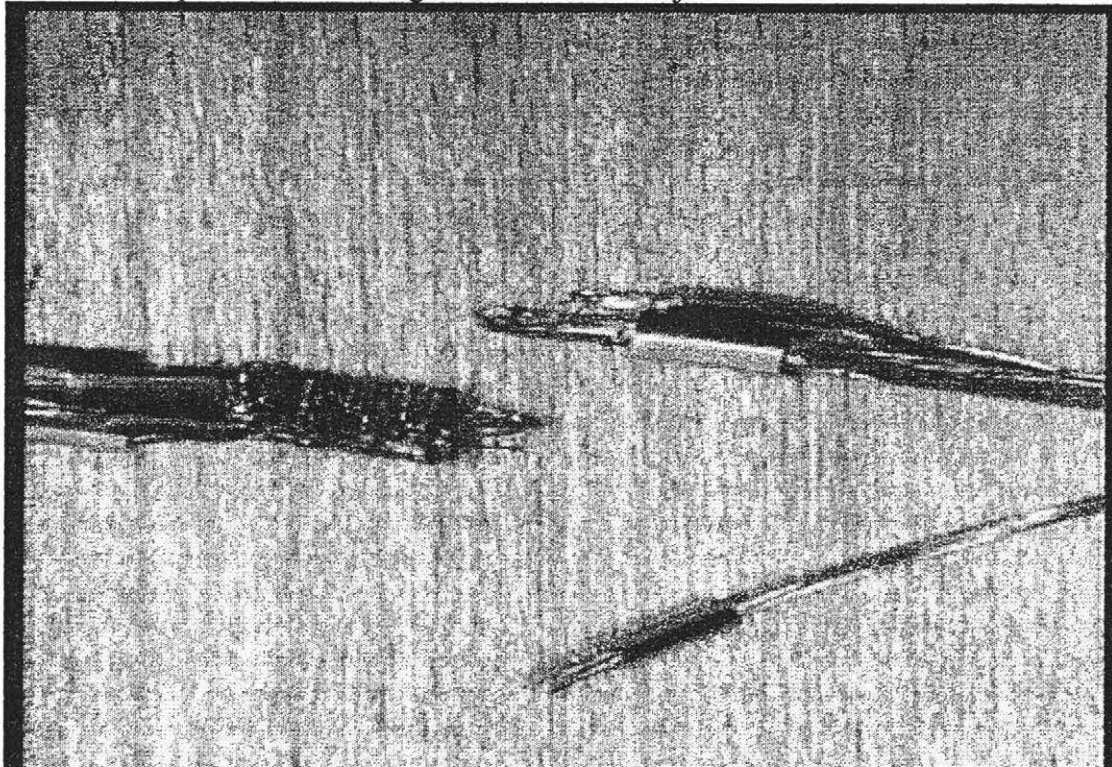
, Failure of the wire strands of an ultrasonically welded connection, by the fracture of strands away from the weld (predominant in lower cross-sectional joints)
